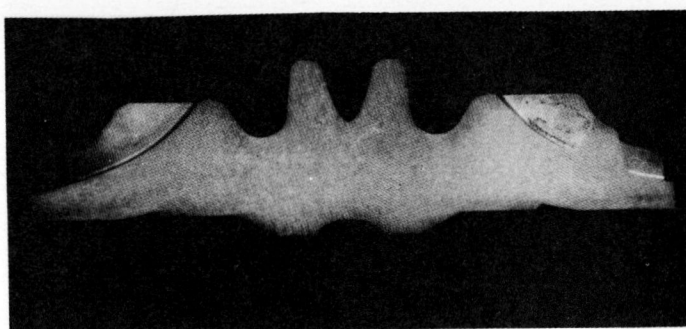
Section through an Isothermally Forged Ti6-4 Impeller
